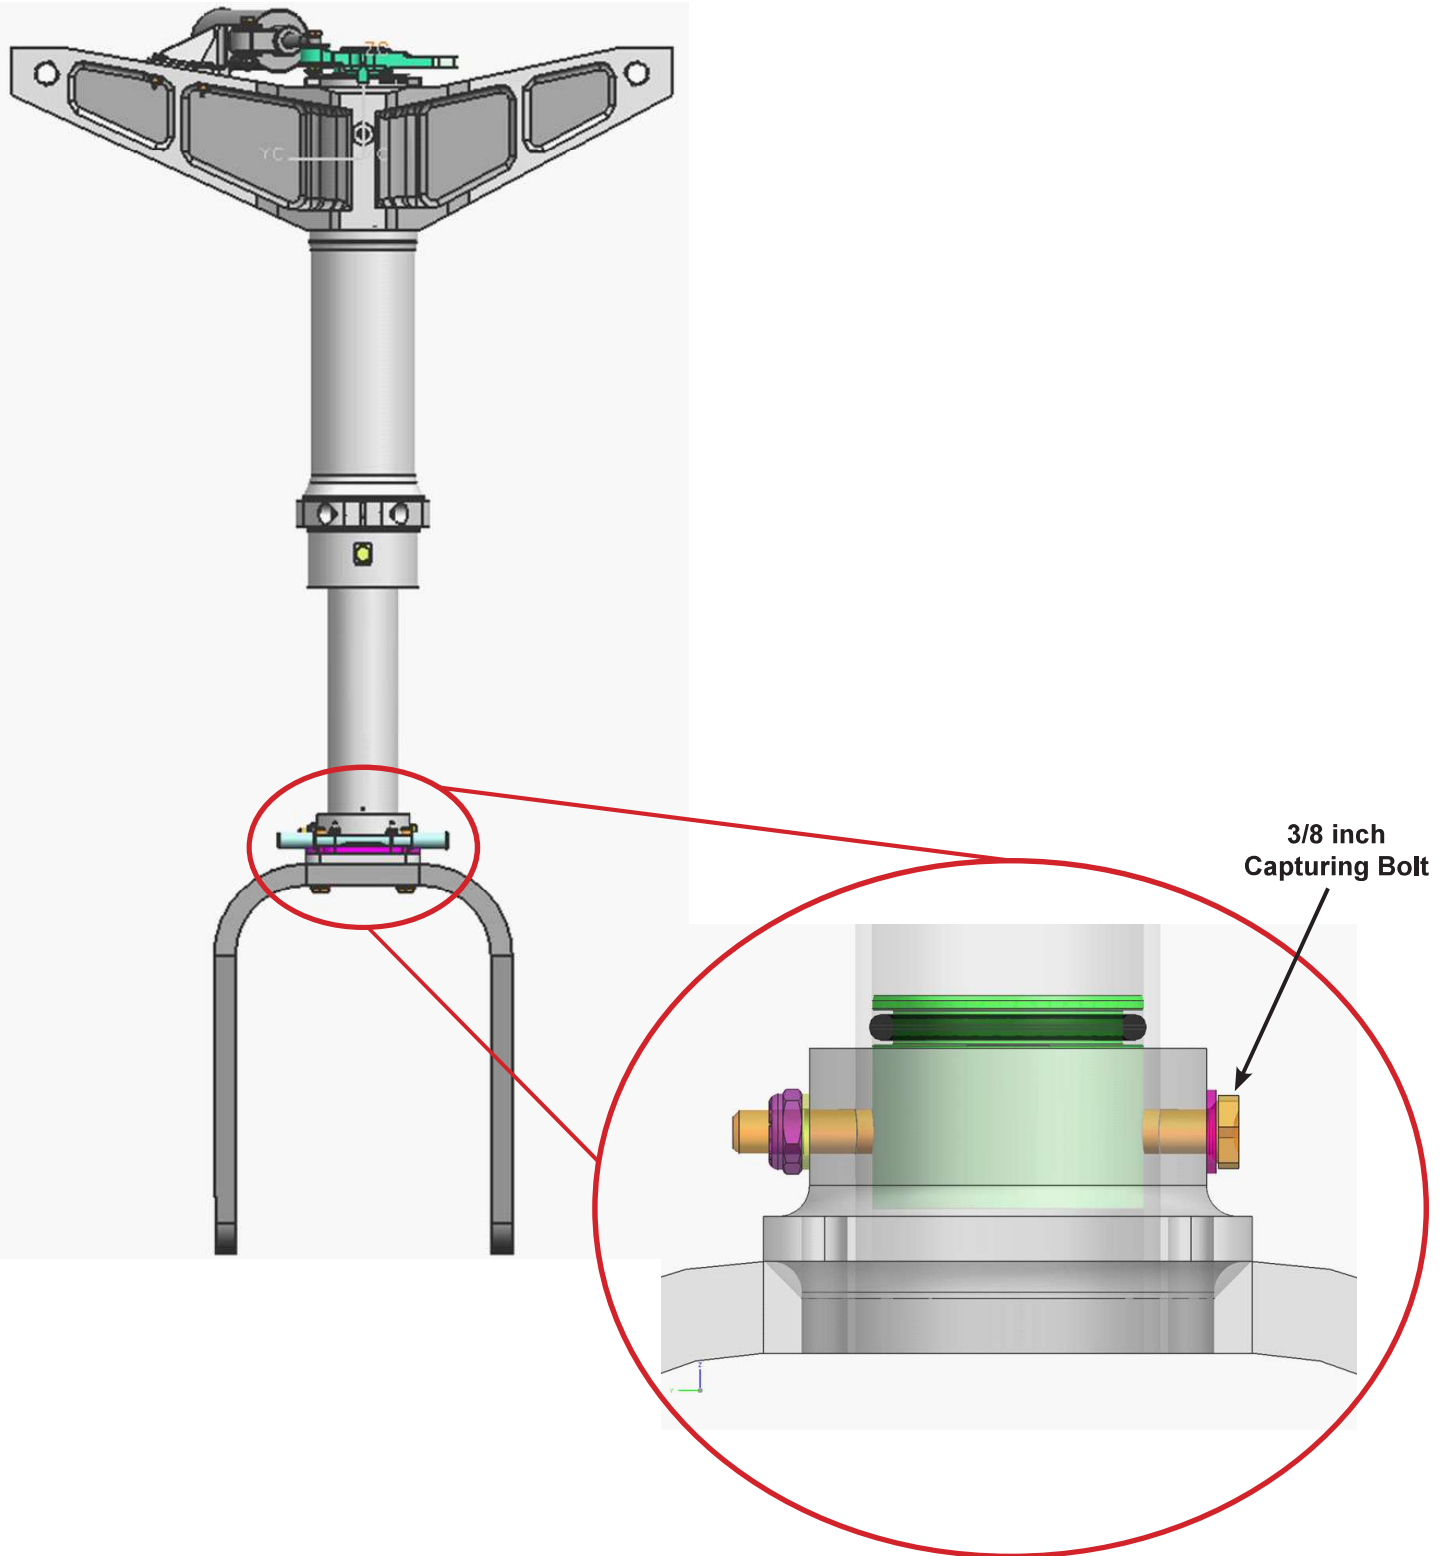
View of the Nose Gear (with expanded view of nose gear piston tube cap)
